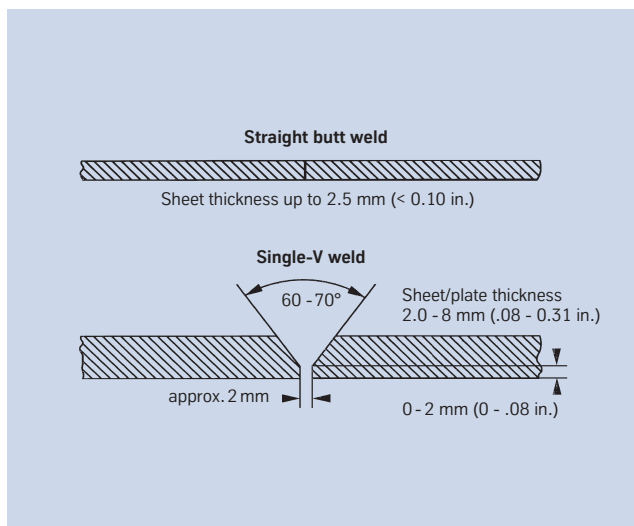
Edge preparation for welding of Crofer 22 APU.
